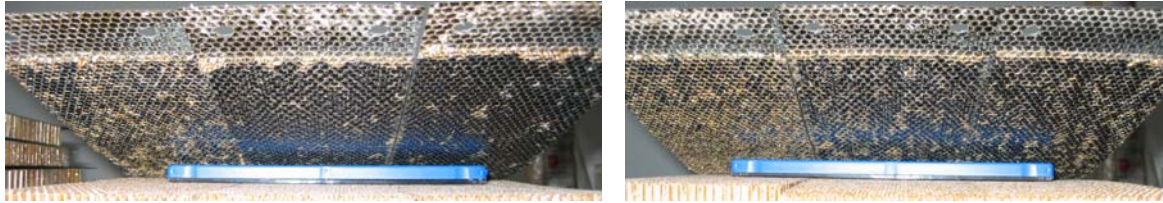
Climbing-drum-peel specimens - Autoclave (left), Quickstep (right)
